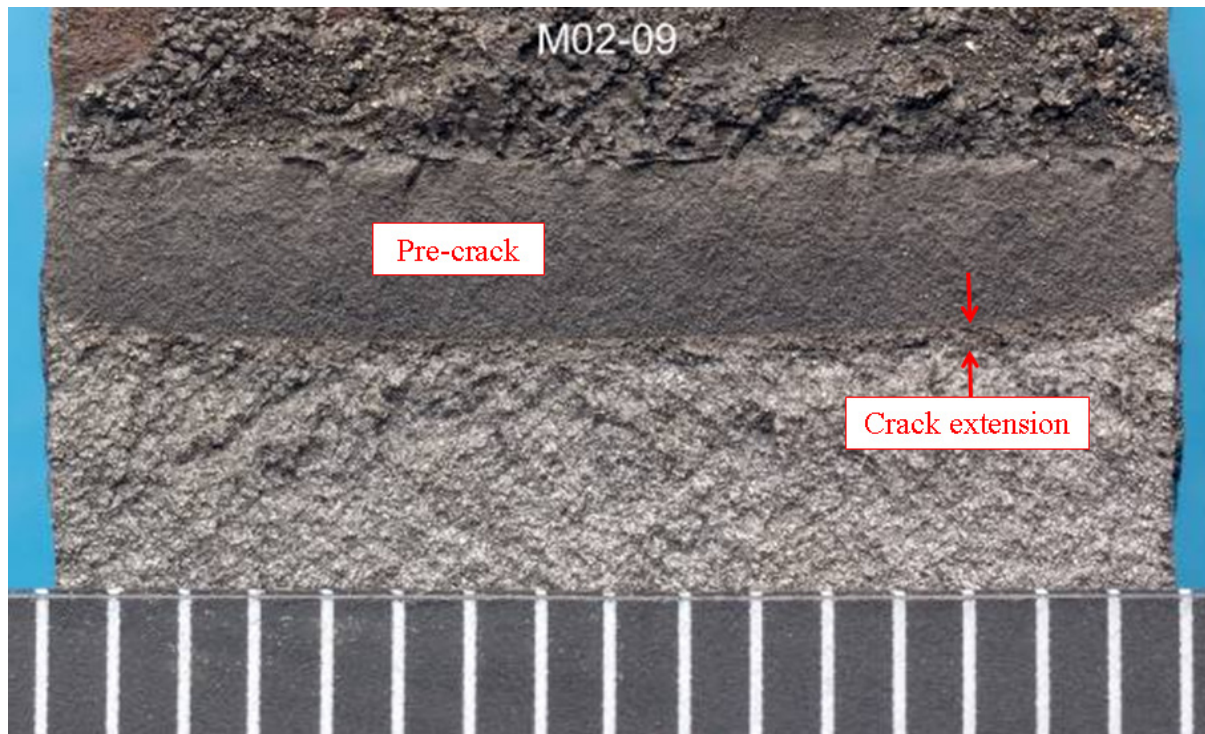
Region of crack extension on fracture face of specimen M02-09 (constant load,  $a=7.92$  mm).
